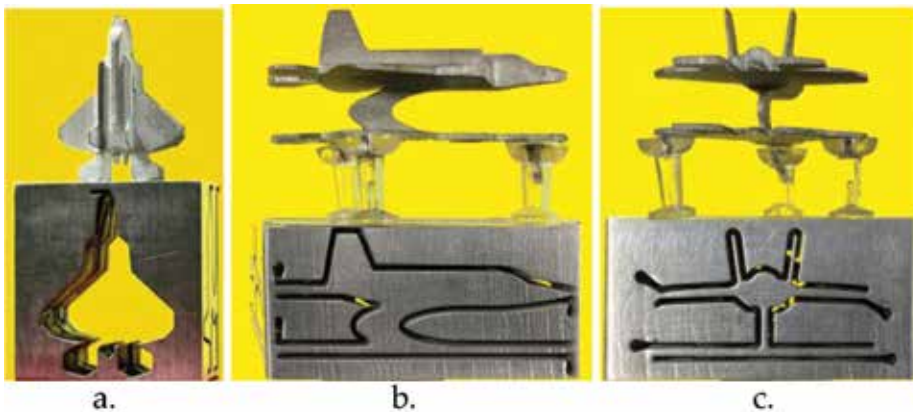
AWJ-cut 3D fighter aircraft—completed in three separate 2D cuts (a) Top view (b) Side view and (c) End view.
